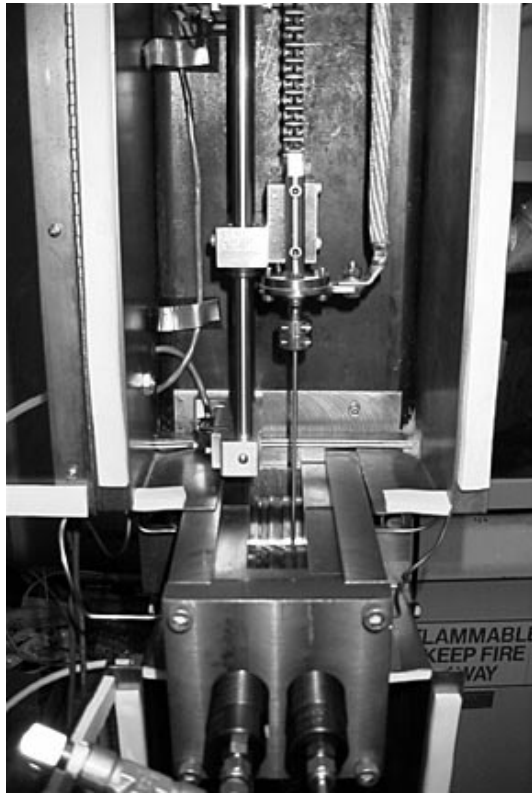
Molybdenum tube positioned in compressive rollers of new molybdenum grid rail fabricating machine.
